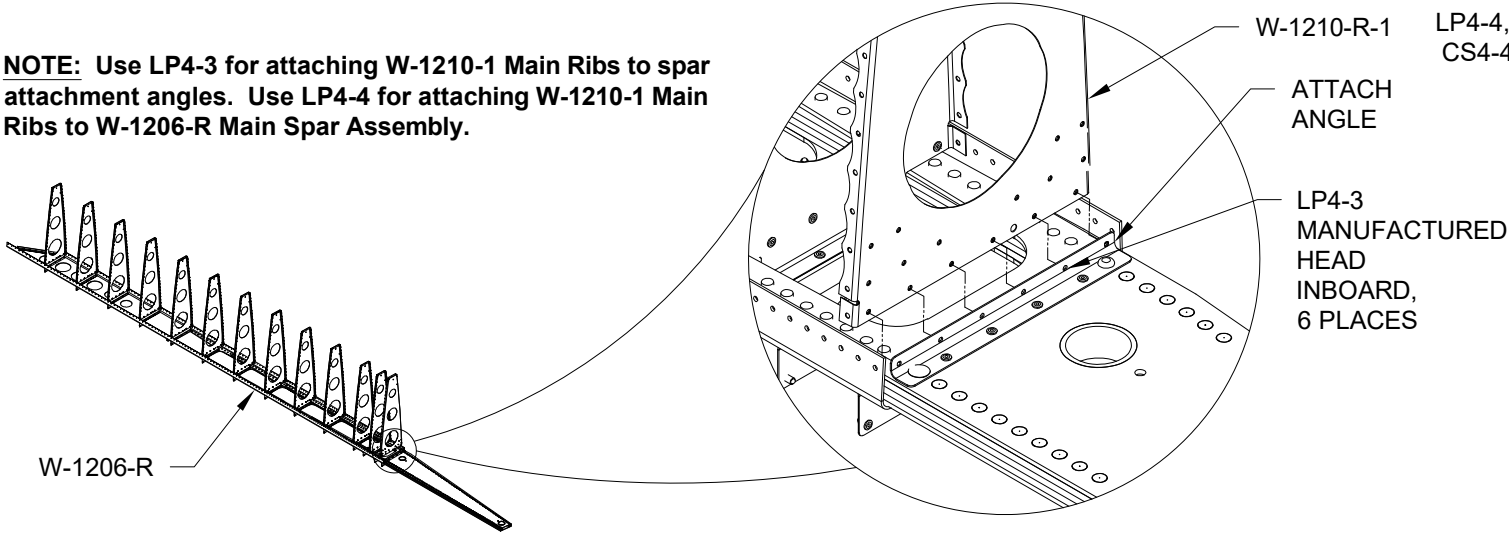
ATTACHING THE MAIN RIB AND DOUBLER
